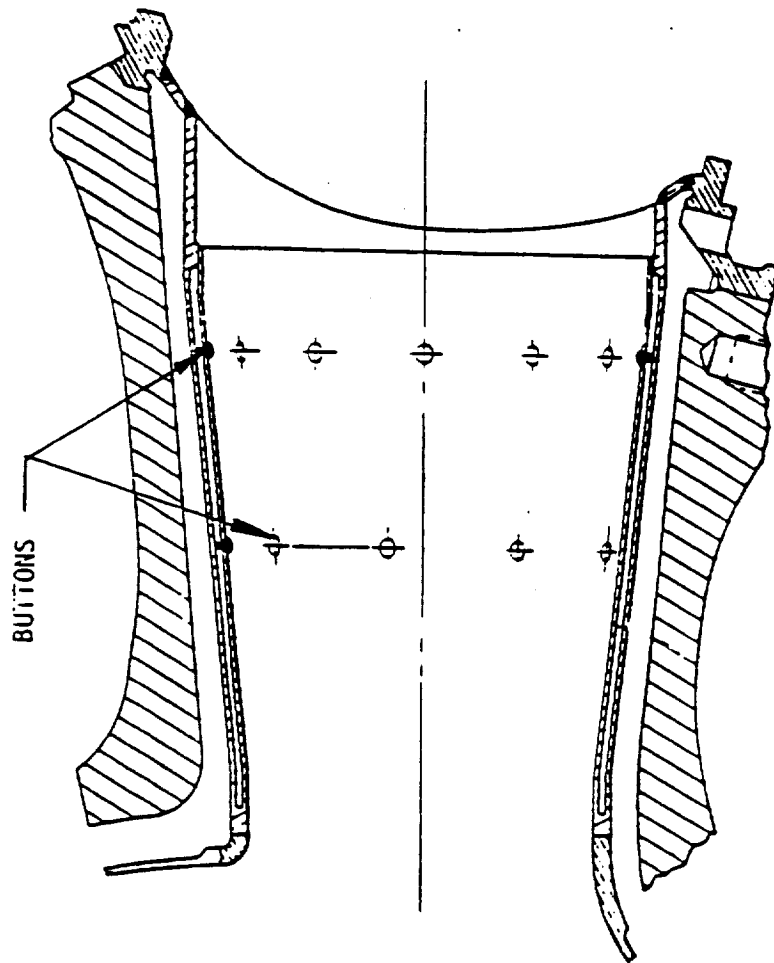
Center Transfer Tube Liner with Motion Limiting Button Configuration
